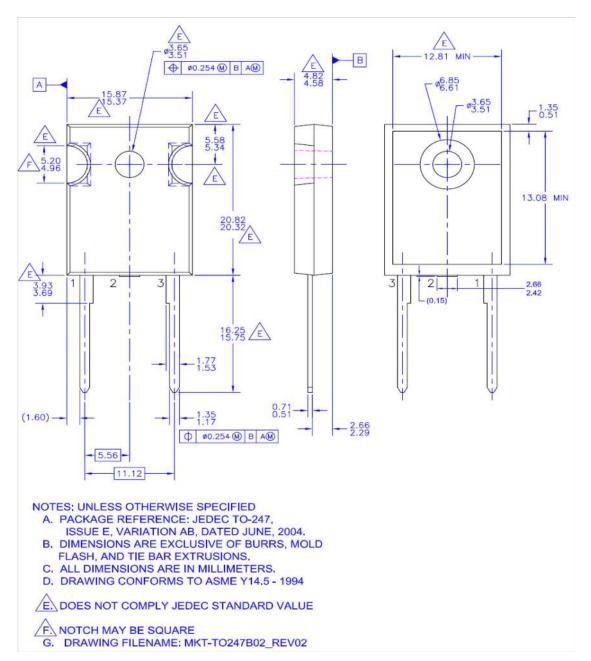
TO-247, Molded, 2LD, Jedec Option AB
